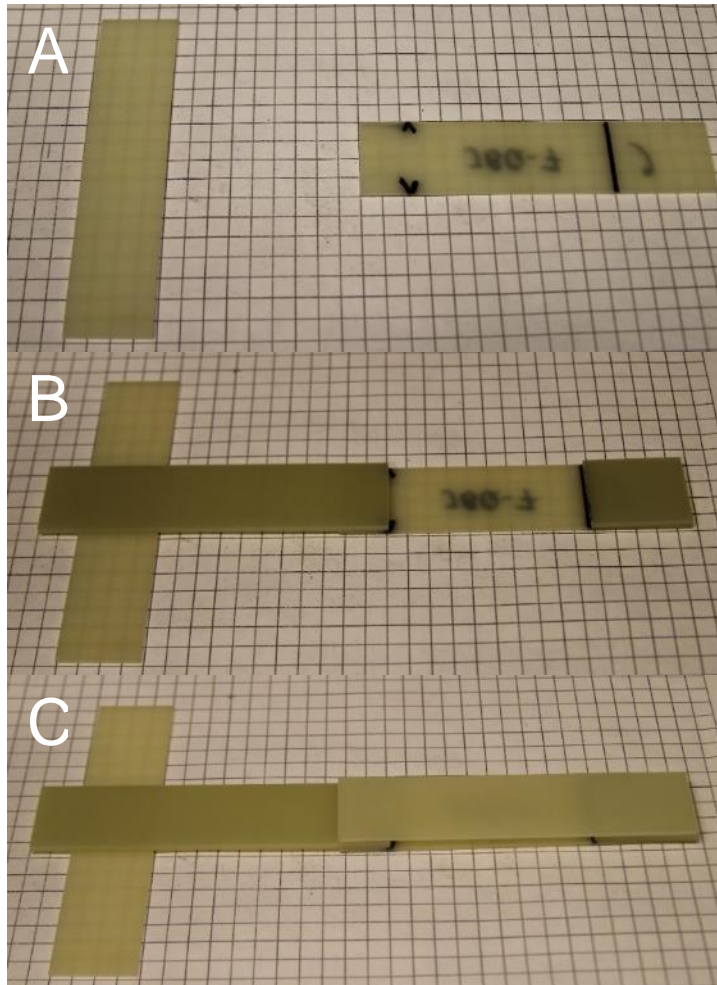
Assembly of adhesive test specimen. (A) Initial set up of first piece and 1.52 mm spacer. (B) Placing the 2.44 mm top piece and bottom spacer. (C) Placing the final 1.52 mm piece.
